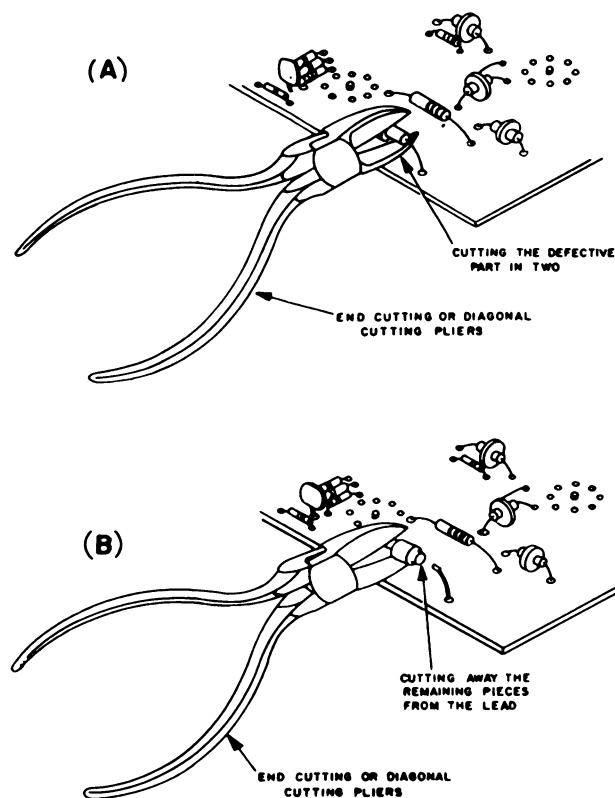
Cutting the defective part for maximum lead length.
